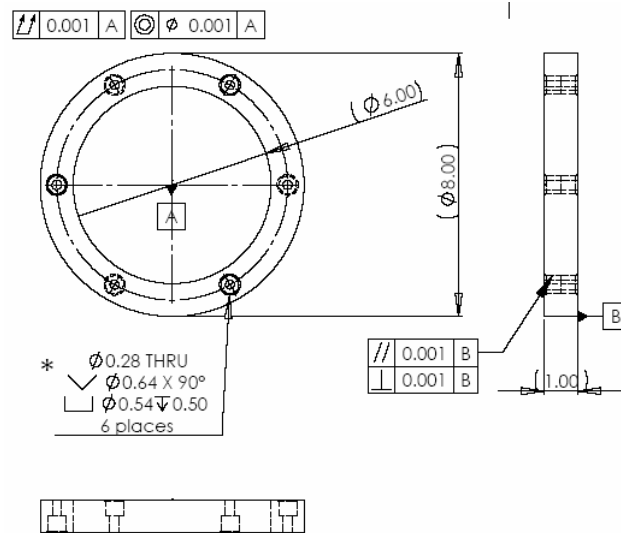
Drawing with tolerance specifications of ring gauge.
